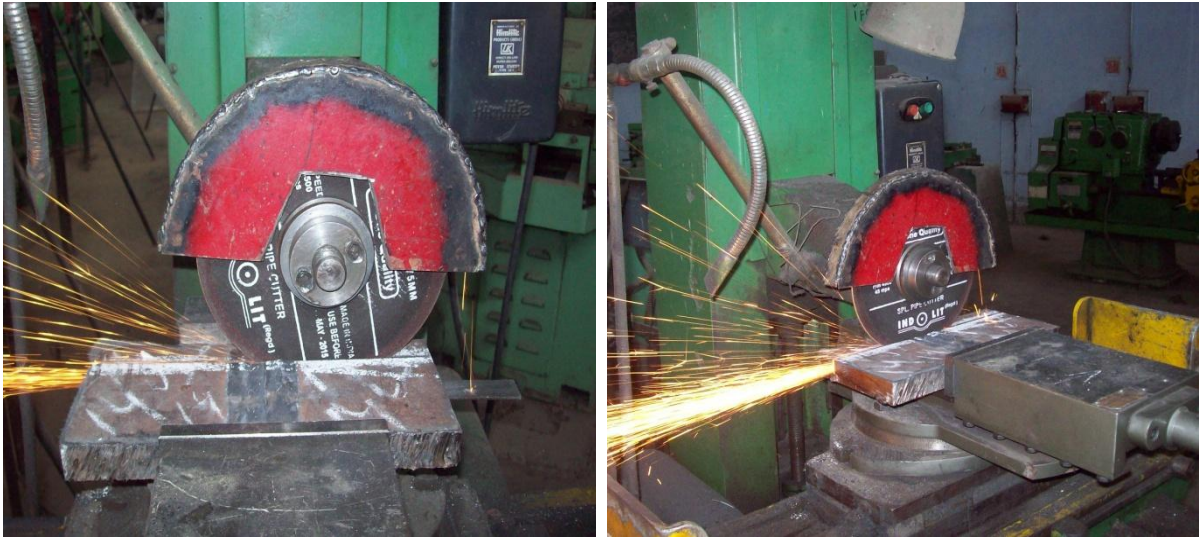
Cutting of plates according to required size on surface grinding machine
